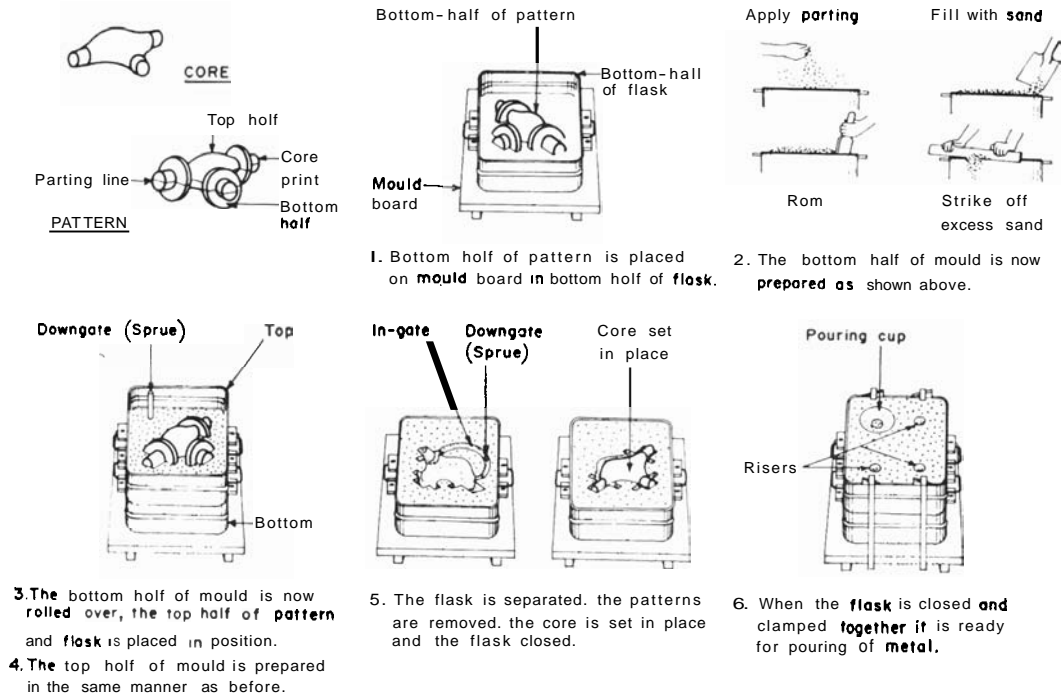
Steps in making a simple mould by hand (from Ref. 2, p. 64).
